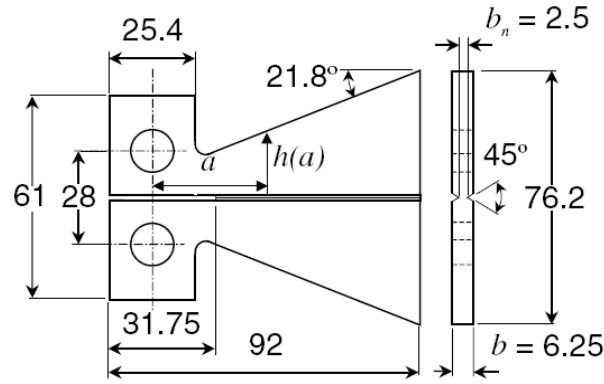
Tapered double-cantilever beam (TDCB) geometry. Dimensions are in millimeters. [6]
